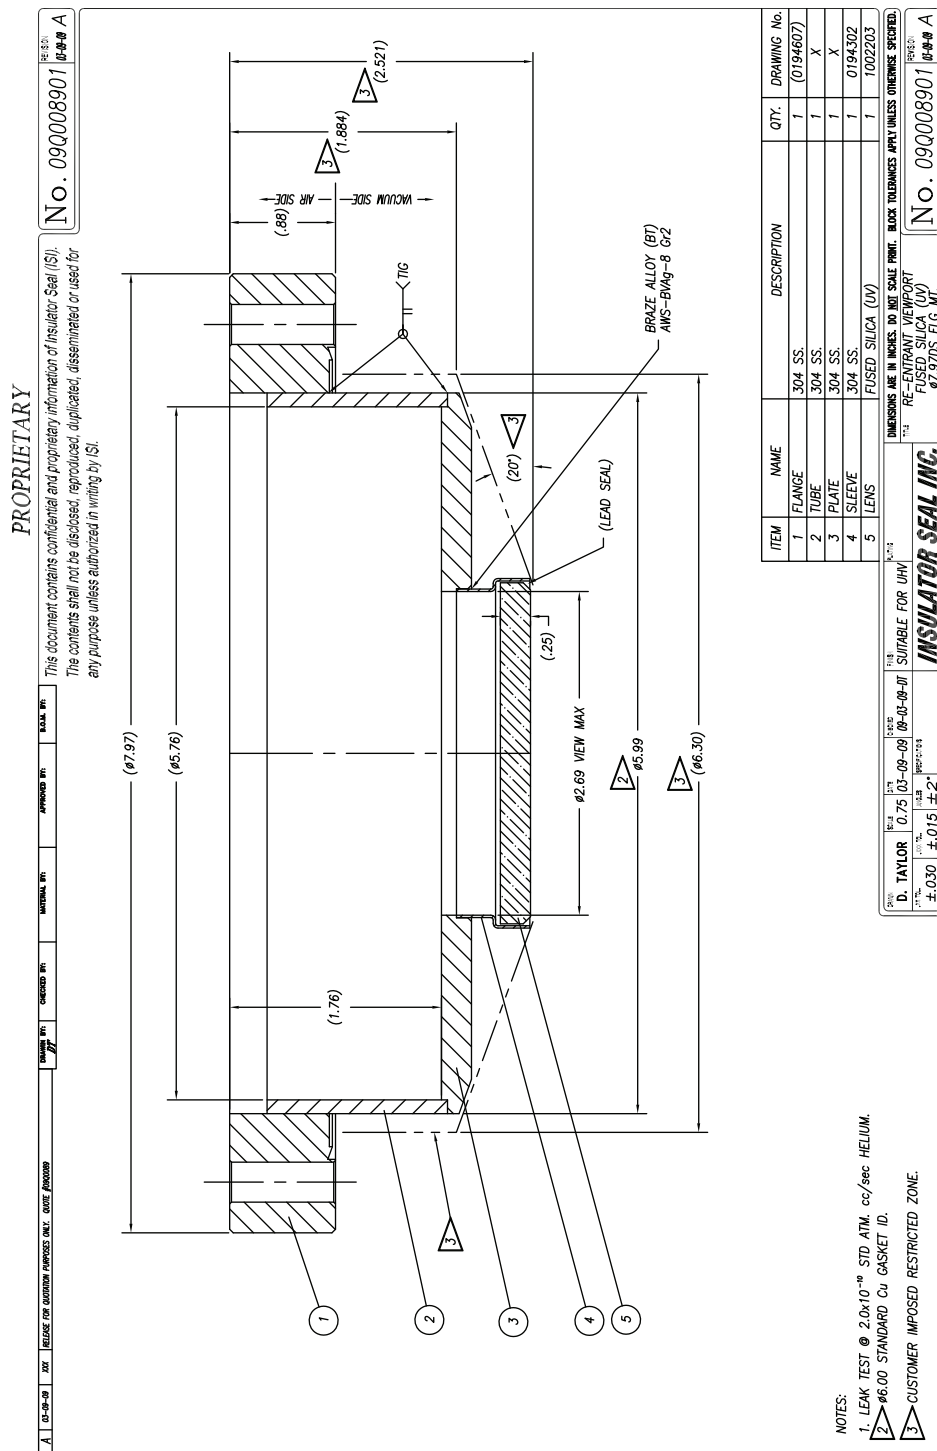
Manufacturer's drawing for the recessed "bucket" windows. While a standard 8" copper gasket does fit per note 2, the clearance is so tight it would be easier to use a larger ID gasket, such as those sold by Kimball Physics. The lead glass-to-metal seal limits bakeout temperature to 150 °C. Written permission was obtained to include the drawing in this dissertation.
